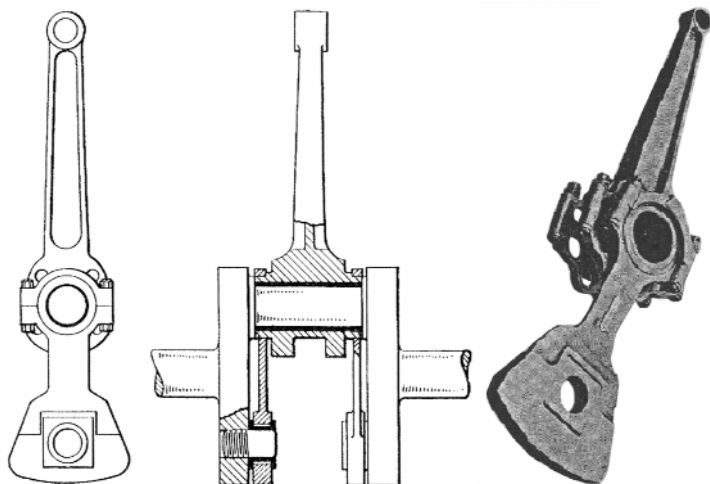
Bristol Jupiter Connecting Rod Big-End Balancing Counterweights
